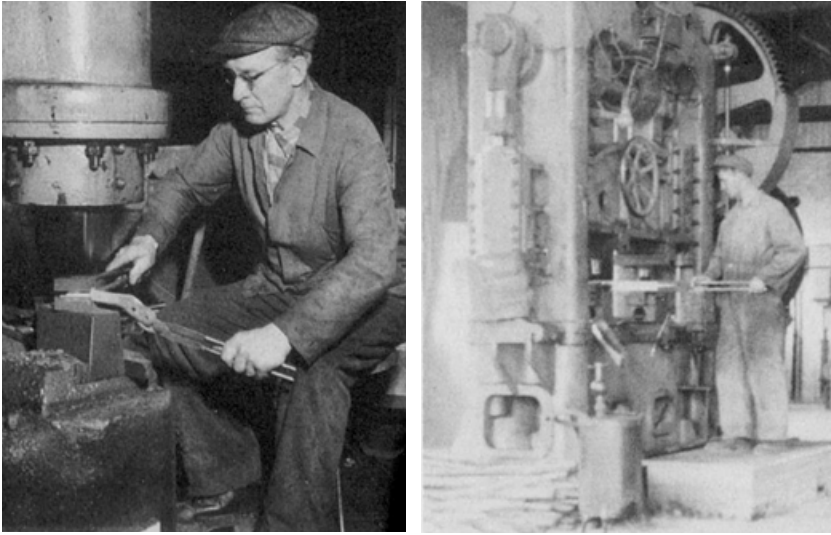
Andreas Nysveen with a welding hammer, and Jørgen Kirkevold with a welding press. From *75 år med Moelven-klubben*.
